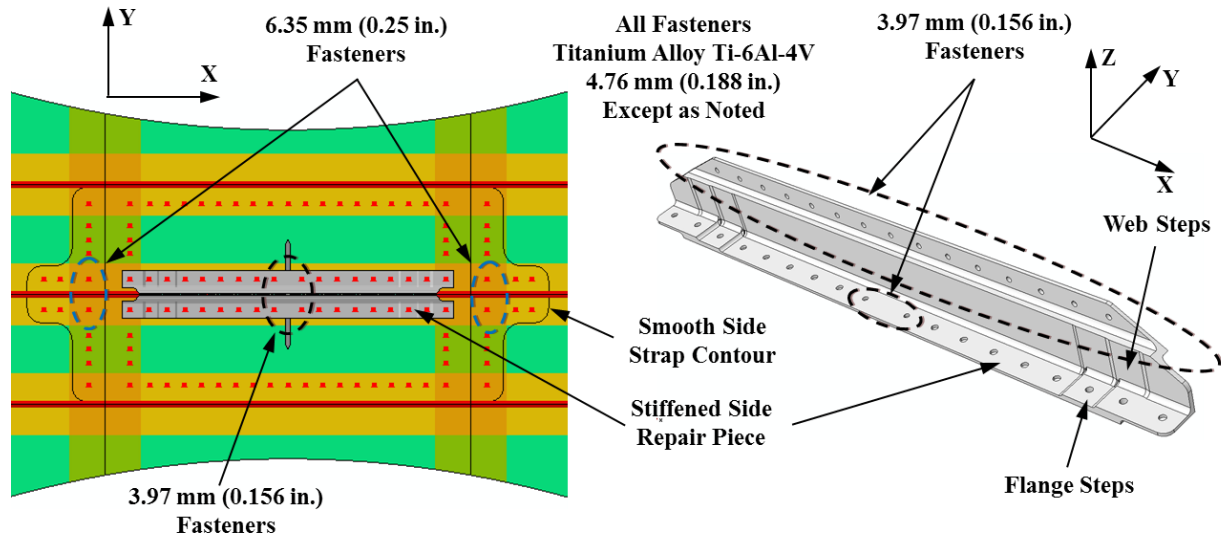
Stiffened side metallic assembly and fastener pattern details.
